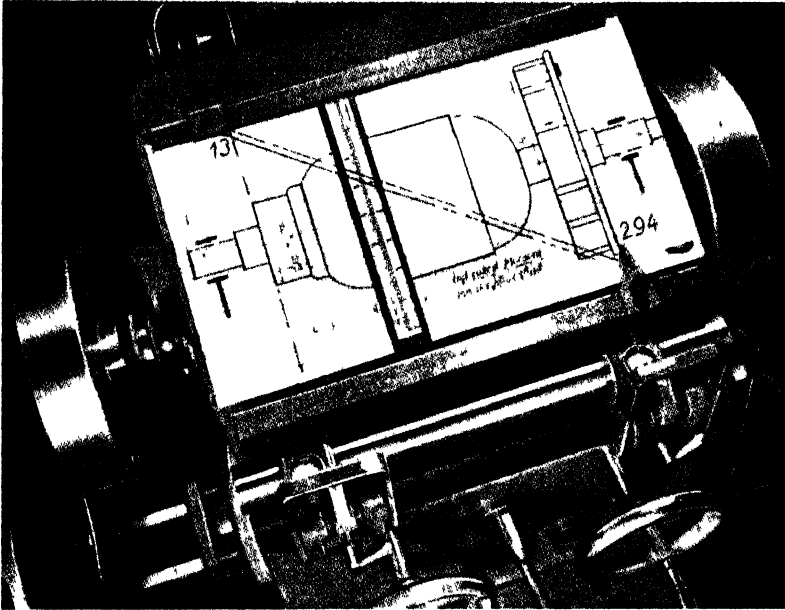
CHART SETTING DEVICE, SHOWING SCALE DRAWING OF BODY TO BE BALANCED FIXED TO TOP OF MACHINE HOUSING
